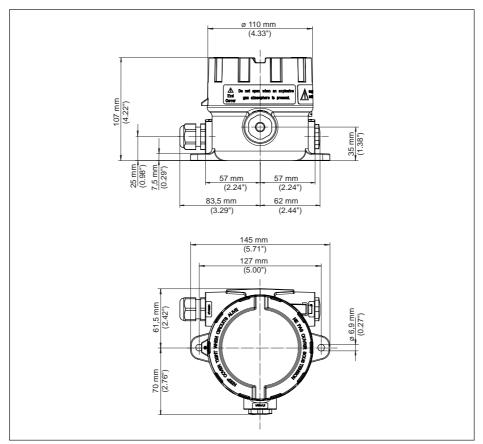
Dimensions PLICSMOBILE B81 with Aluminium housing
